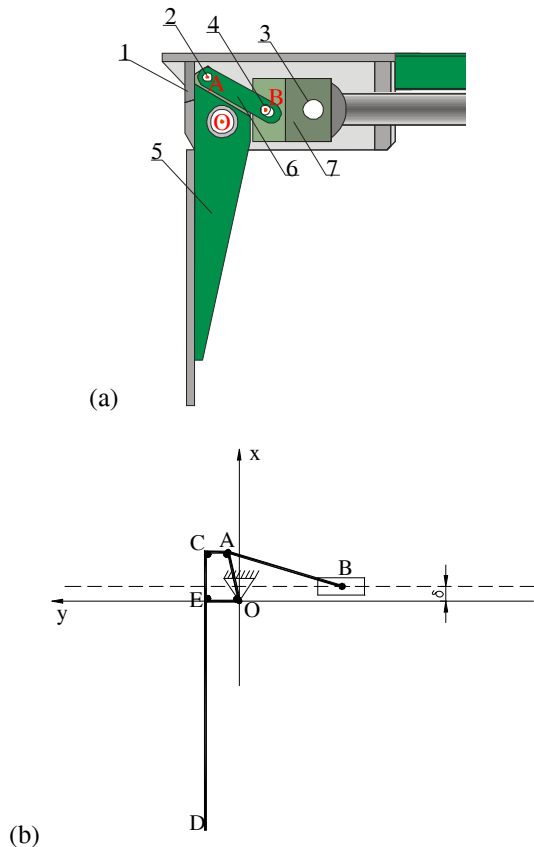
Manipulator (a), 1 – case; 2, 3 – pivots; 4 – pivot with large tolerance; 5 – rib with a vane, 6 – connecting plate; 7 – slider and its model (b) O, A – pivots; B – pivot with a large tolerance; OACED – rigid link
